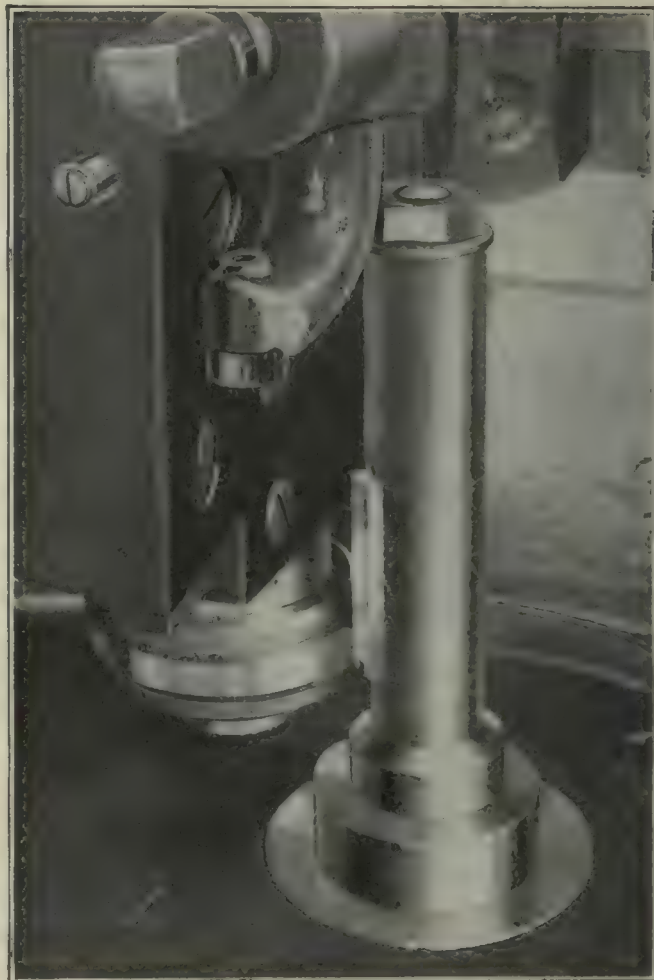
METHOD USED IN PRODUCING KEYED BUSHING ON THE FELLOWS GEAR SHAPER
